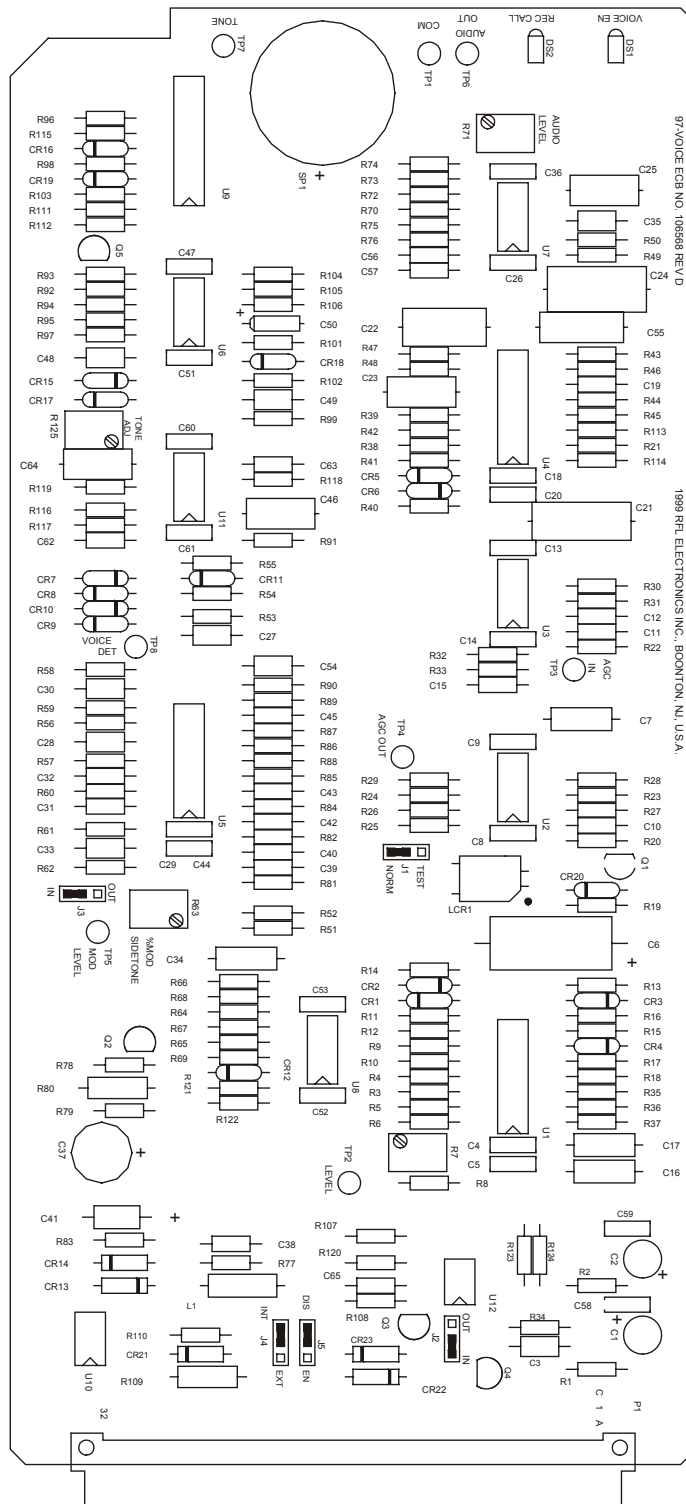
Component locator drawing, RFL 9785 Voice Module
